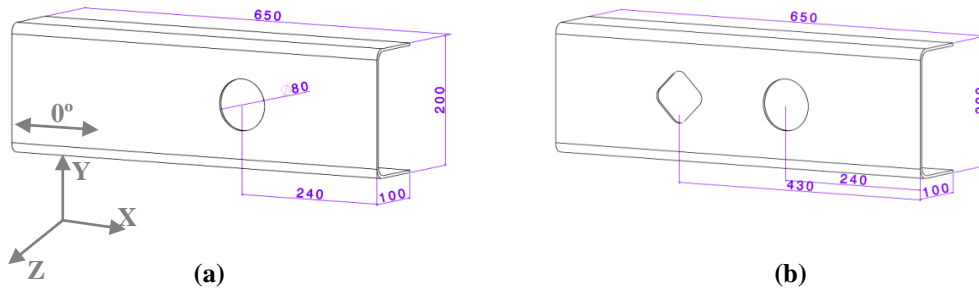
The C-section beam with (a) Single cutout and (b) Double cutouts (units in mm)
